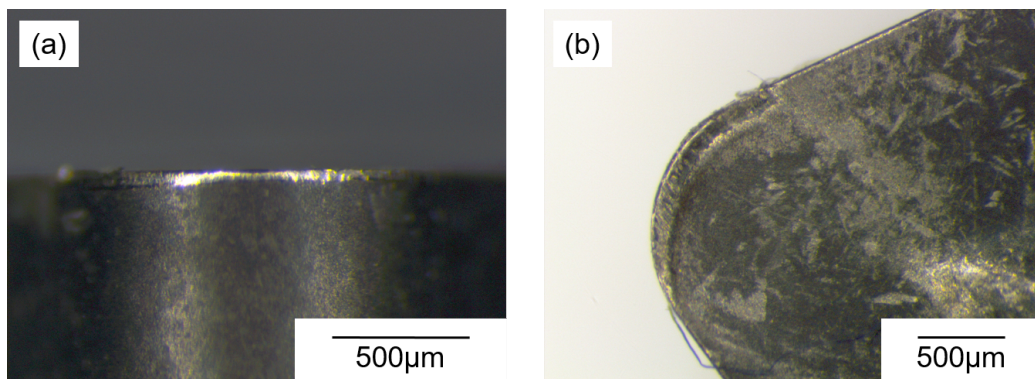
Microscope images showing the degree of tool wear after trial 3.2.6 on billet 4.1. Showing (a) the flank face and (b) the rake face.
